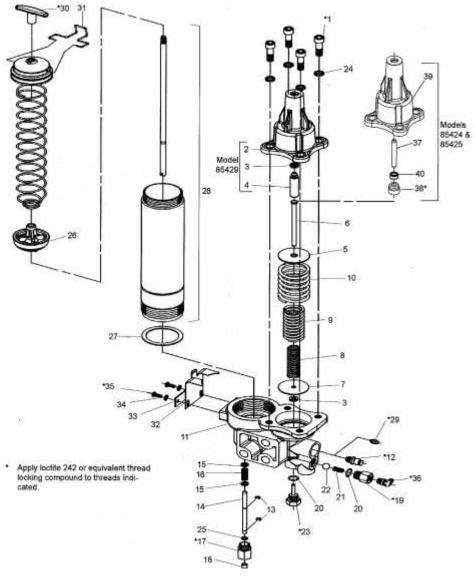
Pump Assembly 85425 [570968] 85429 [103270]
